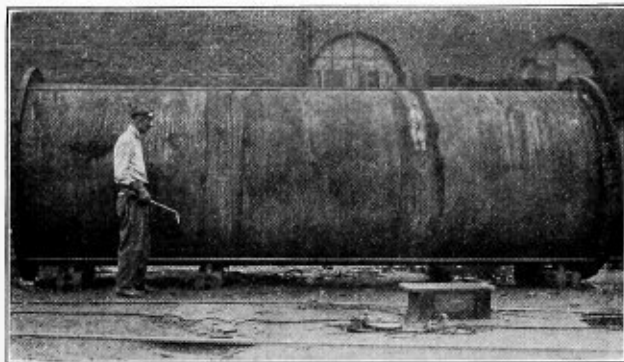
Steel Cylinder, With Seams and Flanges Welded
